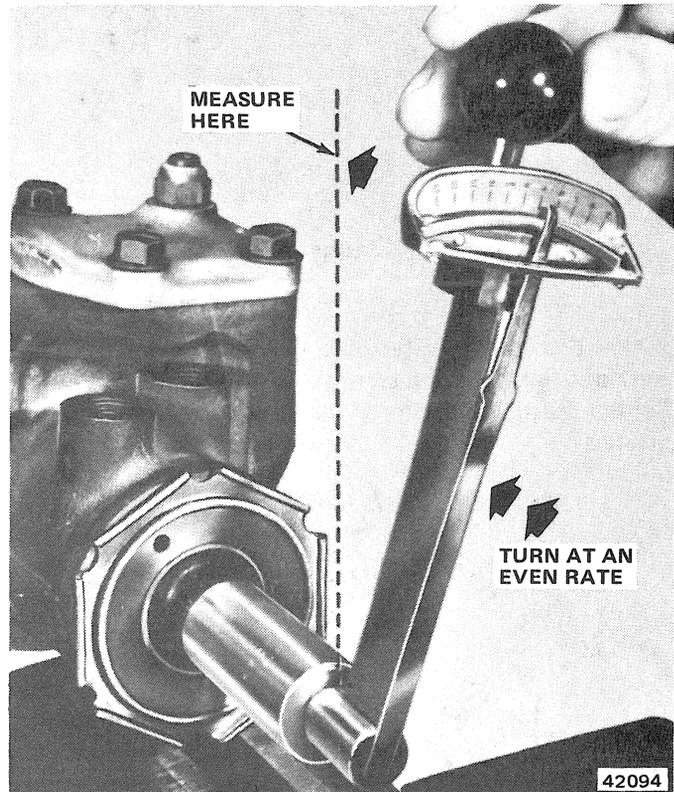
L-43 Measuring Wormshaft Bearing Preload
